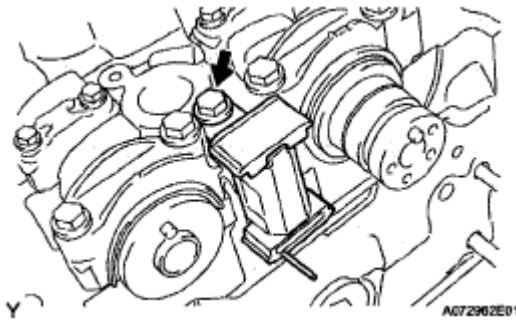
Removing Camshaft Timing Gear And Bolt
